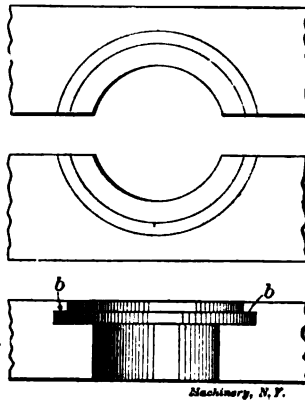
Arrangement of Vise Jaws to Hold Piece Shown in Fig. 6.
